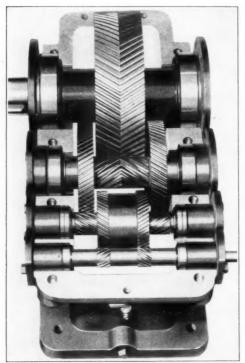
Section of the Foote IXL unit type powered gear set showing certain features pertinent to the lubricating system, also bearings and methods of scaling to prevent oil leakage.
